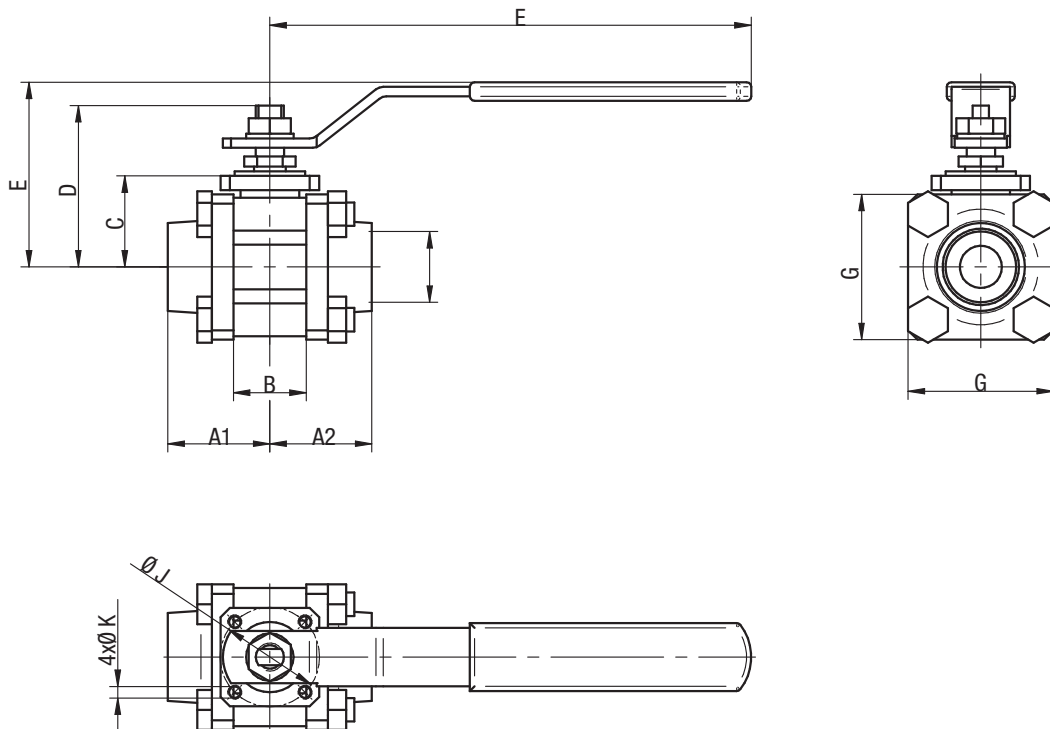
Dimensional drawing of the ball valve with internal thread (without stop pins)
